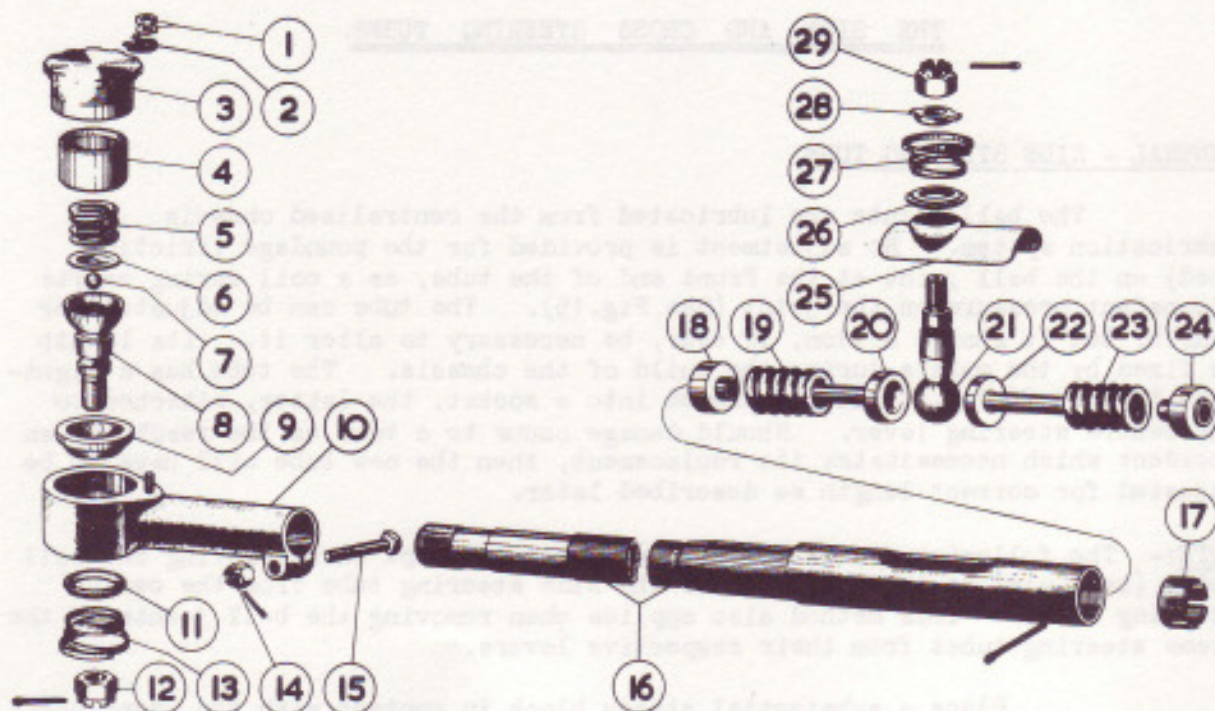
"EXPLODED" VIEW OF SIDE STEERING TUBE.
